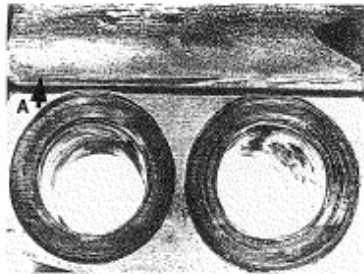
Site of fracture initiation (A) at a nick in the fillet, caused by grinding.
